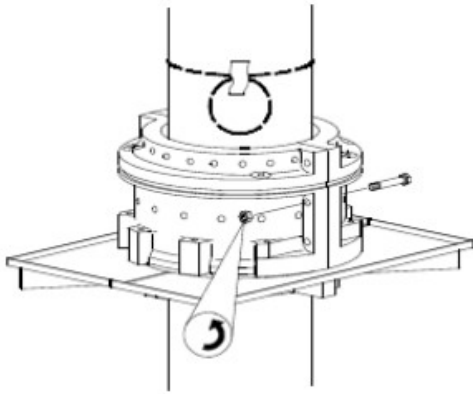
Disassembly of the Scavenging air receiver from the piston rod [1]
